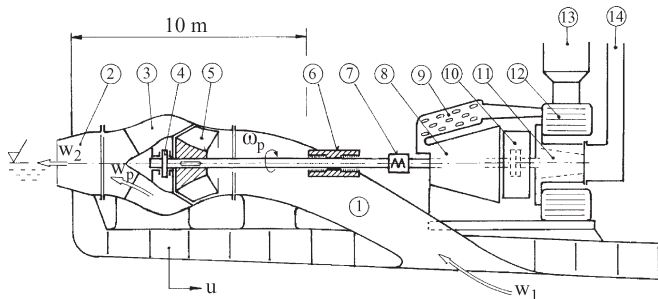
The waterjet propulsion system located in the ship's stern part: 1 - diffuser; 2 - confusor (outflow nozzle); 3 - guide vanes; 4 - thrust & journal bearing; 5 - diagonal-helical pump; 6 - labyrinth gland/journal bearing; 7 - highly flexible coupling; 8 - gas turbine; 9 - combustion chamber; 10 - gear box; 11 - axial-radial compressor; 12 - recovery heat exchanger (air preheater); 13 - exhaust gas duct; 14 - air inflow duct
